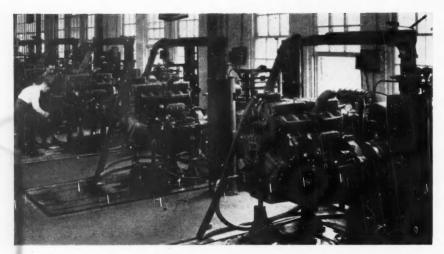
Engine Test Room. Each Engine is Given a Thorough Work-Out Before Being Released for Service
